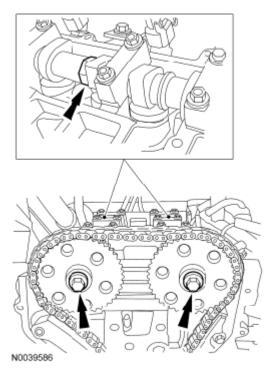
Locating Camshaft Drive Gear Bolts Courtesy of FORD MOTOR CO.
